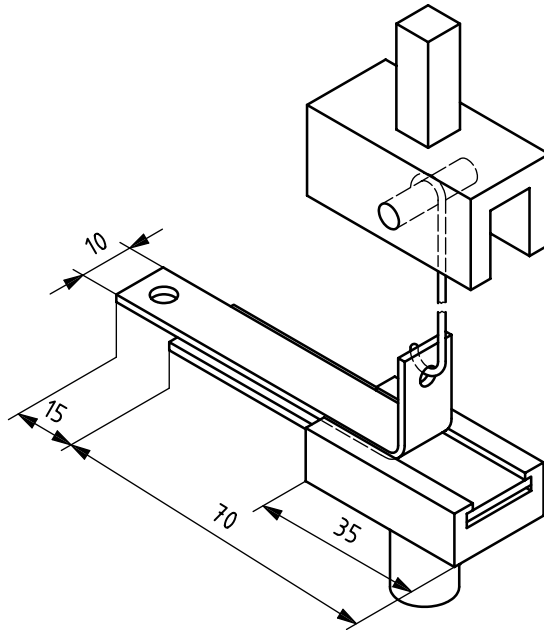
Arrangement of test specimen and clamps for test with hook link system
